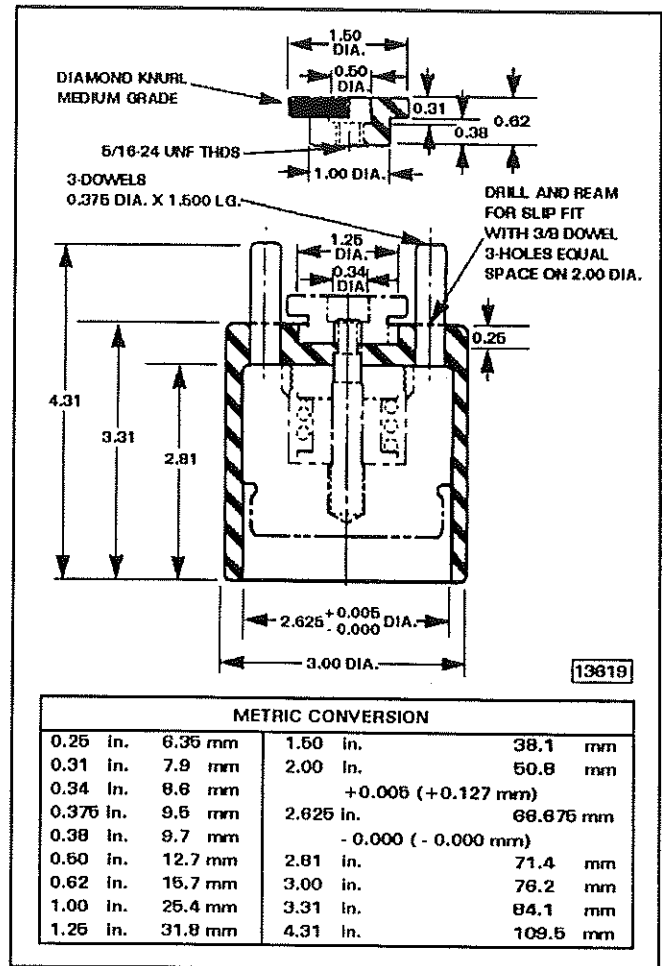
ADJUSTER OR RETURN PIN EXTENDER TOOL
